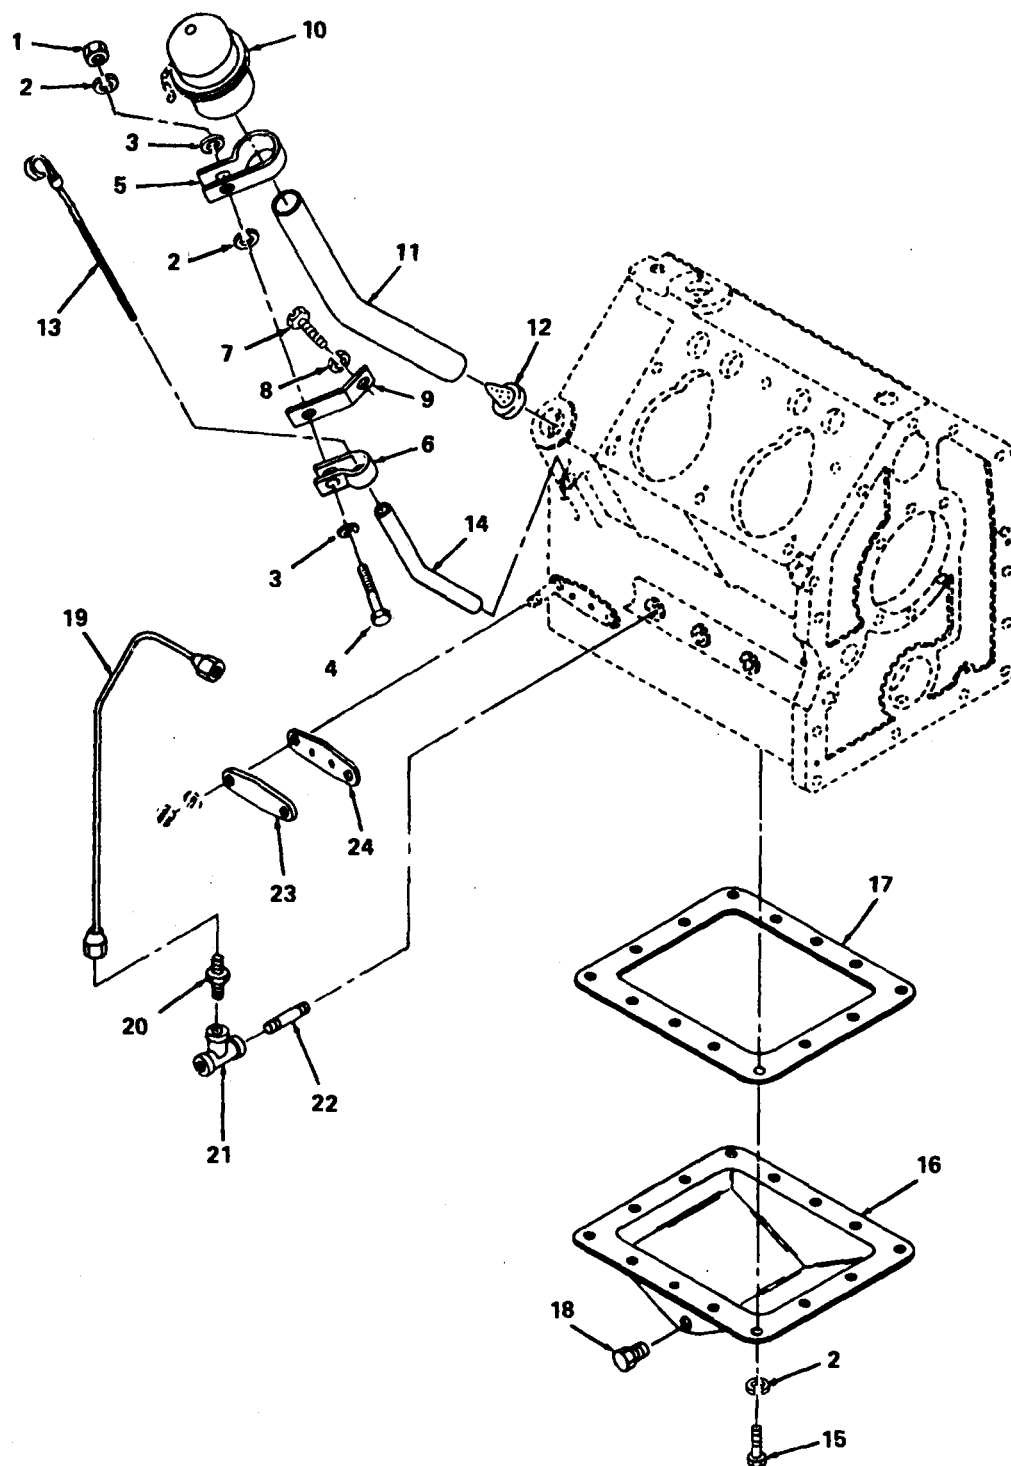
Crankcase Oil Pan Filler Tube, Level Gage and Related Fittings.
